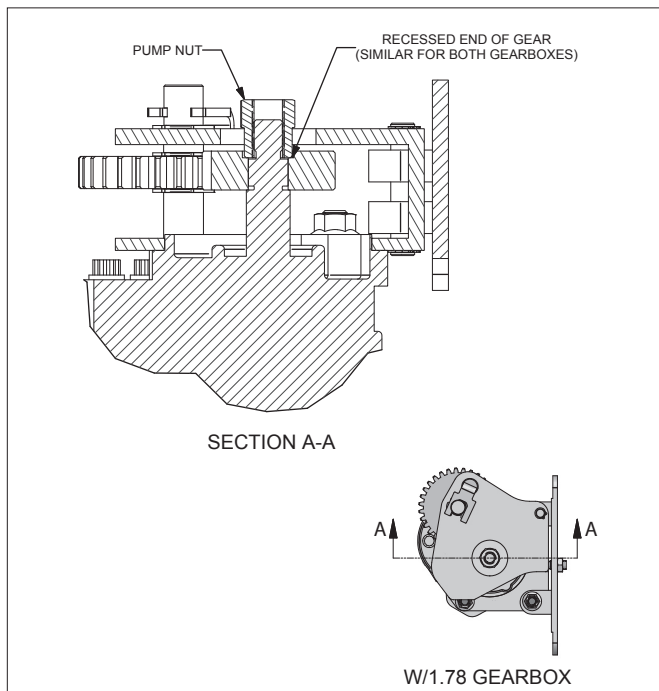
Hydraulic Pump Assembly - Ratio #7
